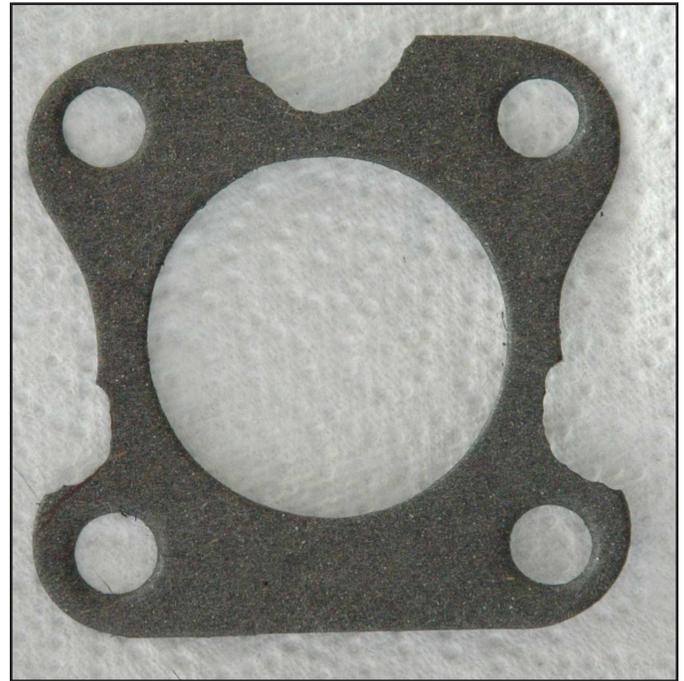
A gasket trimmed to provide clearance for the adapter mounting bolts heads. Only trim enough to just clear the bolt heads. The narrow sides should be on the left and right.
